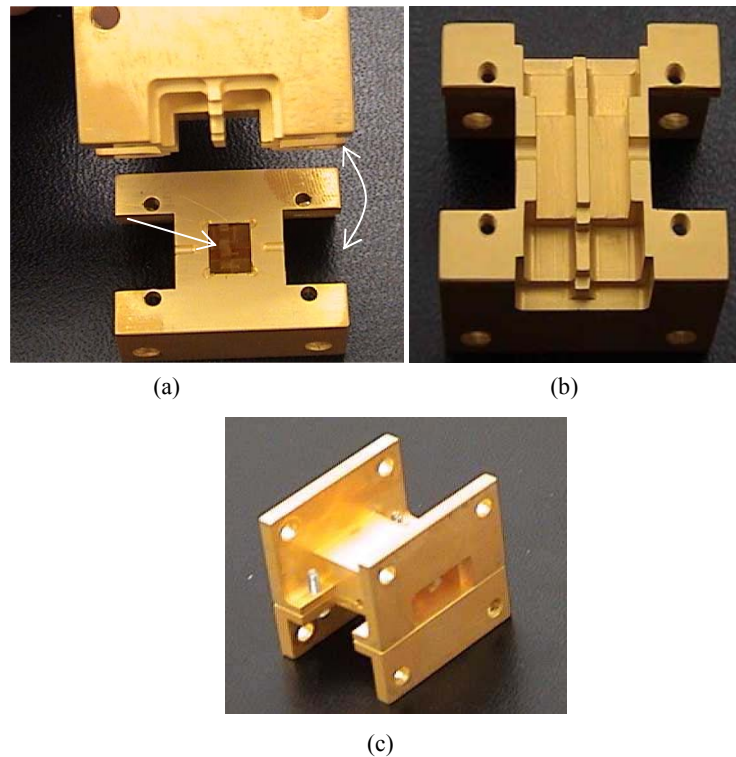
Fabricated waveguide switch (a) bottom plate, (b) top cover, and (c) assembled on top of each other.
